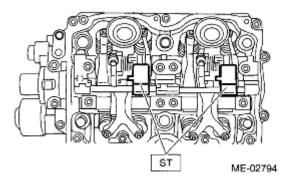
Identifying Intake Valve Rocker Assembly Courtesy of SUBARU OF AMERICA, INC.
